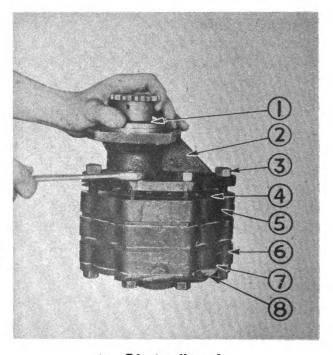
Original from UNIVERSITY OF CALIFORNIA
